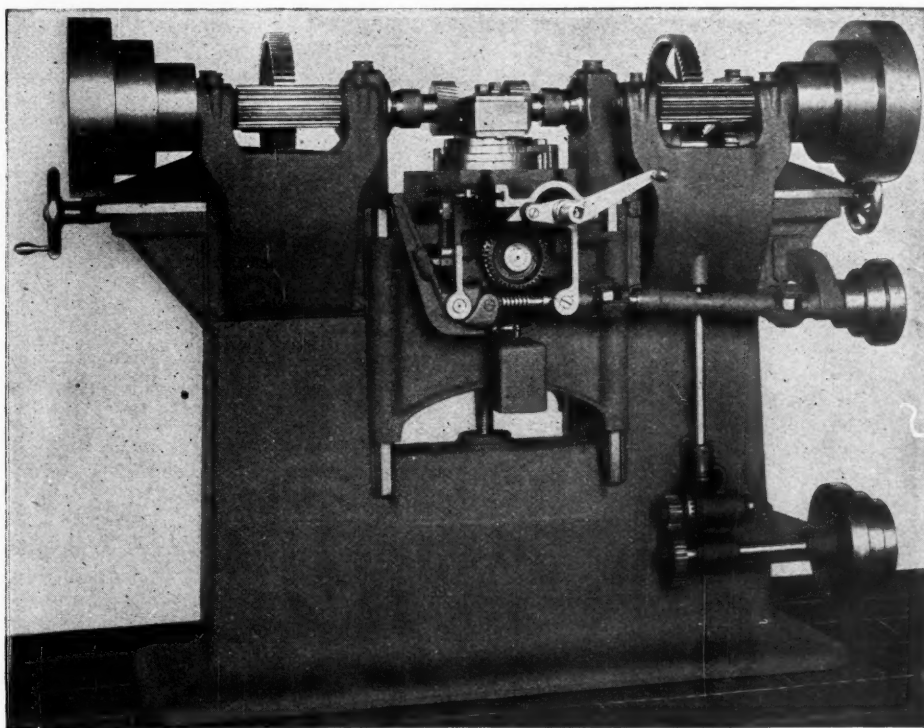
DUPLEX DOUBLE-COLUMN MILLING-MACHINE.
